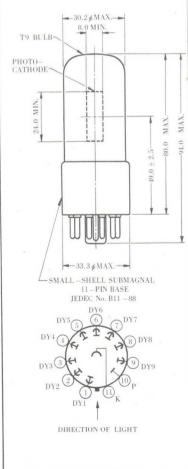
DIMENSIONAL OUTLINES AND BASING DIAGRAM DIMENSIONS IN MILLIMETERS
